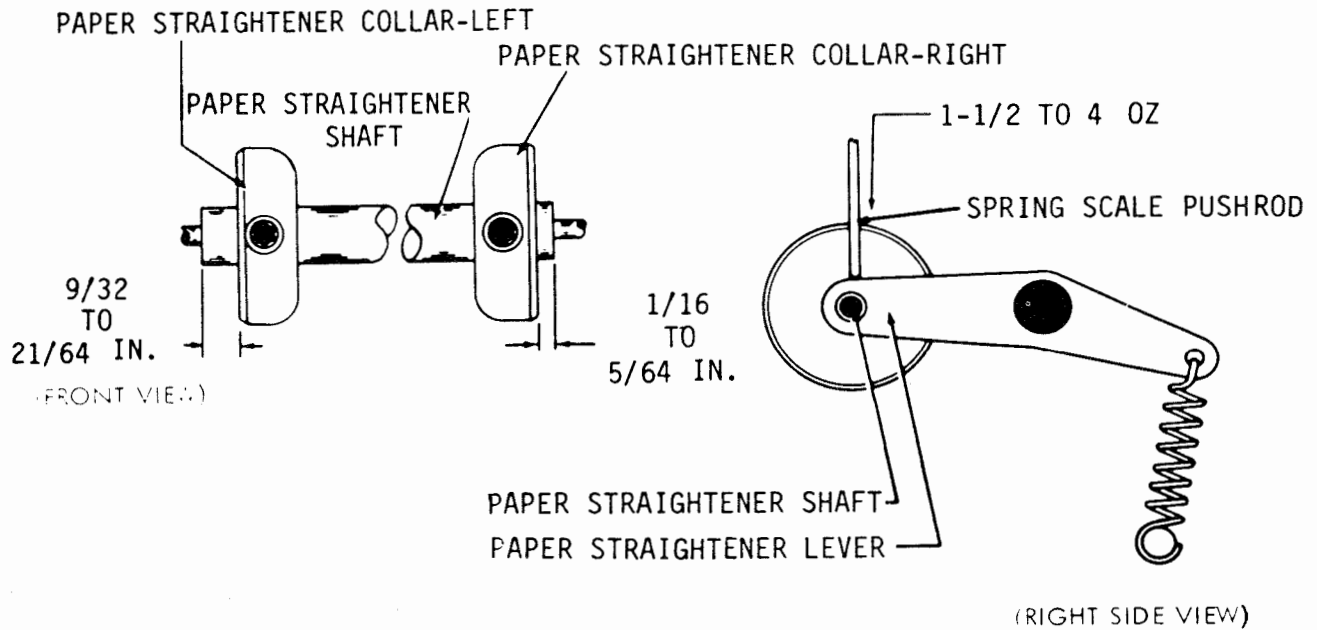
Paper Straightener Collar (Friction Feed) and Paper Straightener Lever Spring
